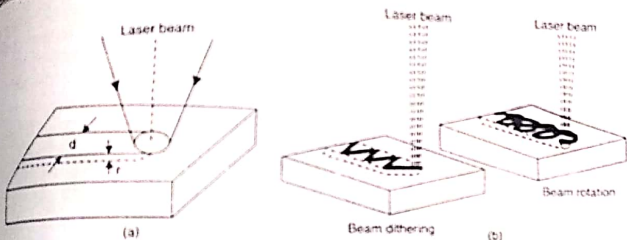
(a) Defocused laser beam used in workpiece for heat treatment
